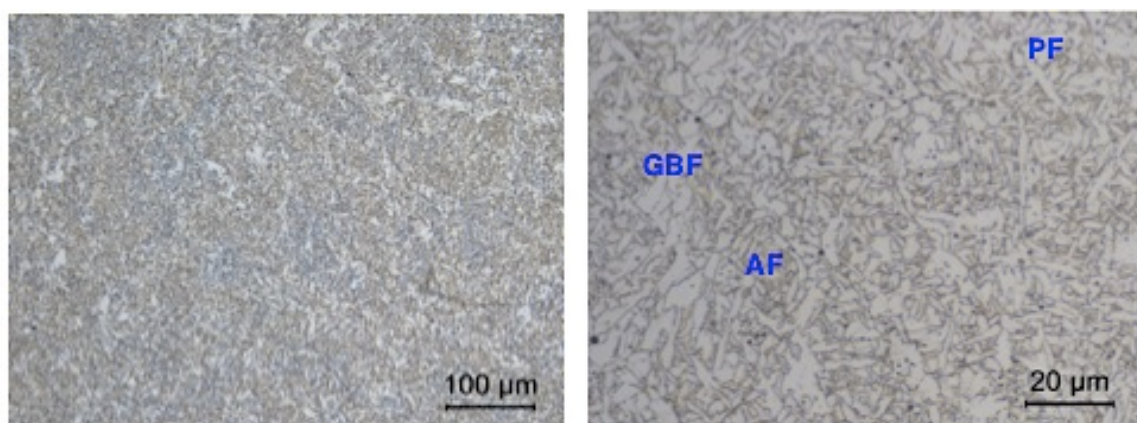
Coarse-grained weld metal of specimen 2.1.
